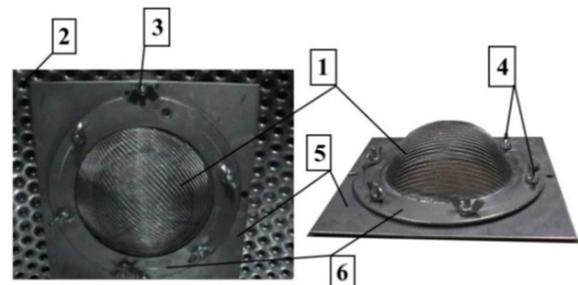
External view of form fixation element: 1 - forming element; 2 - drum; 3 - fixation of fastening platform; 4 - nut with screw; 5 - fastening platform; 6 - clamping ring
